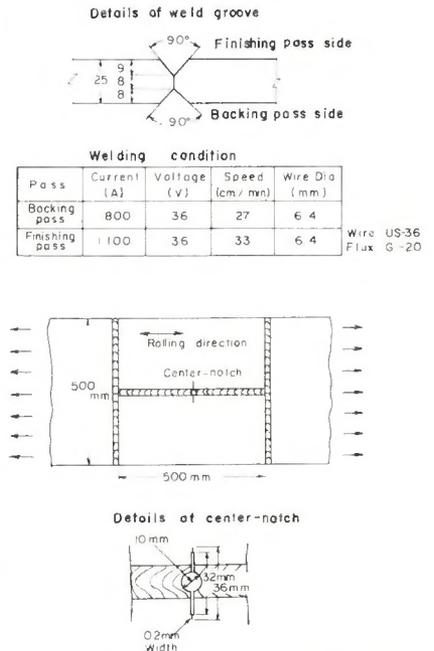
Longitudinally welded and center-notched wide plate tensile specimen
